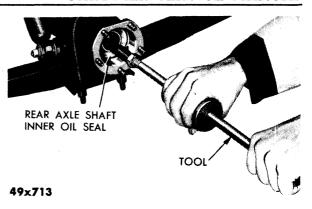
Removing Axle Shaft Inner Oil Seal Using Tool C-637
